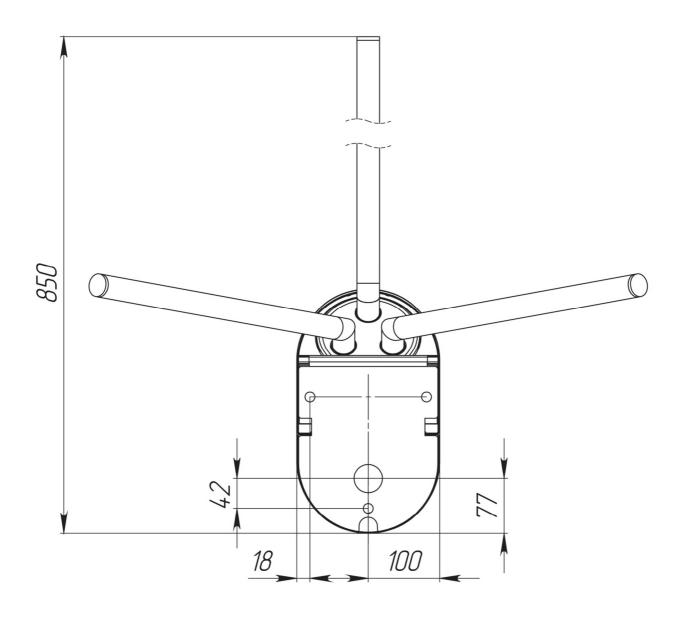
Location of mounting holes in relation to overall dimensions of the turnstile
